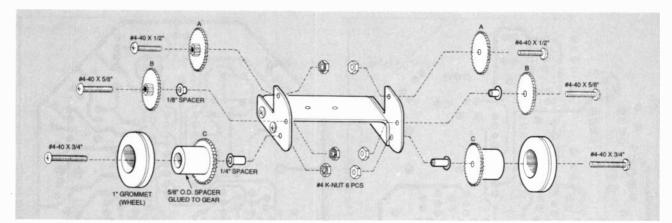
GEARS ARE MOUNTED with No. 4-40 machine screws and nuts. Threaded holes in the mounting bracket hold the gear screws, with nuts locking the screws in place.
